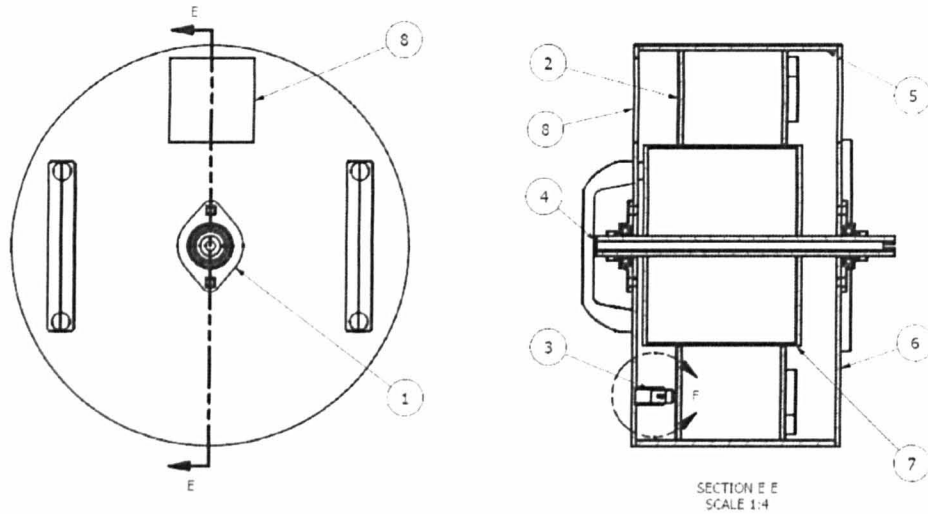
Internal workings of a microgravity shear cell - (1) Housing unit with bearing (2) Movable pressure disk (3) Pressure springs (4) Steel shaft (5) Fixed outer cylinder (6) Fixed bottom plate (7) Rotating inner cylinder (8) Camera viewport.
